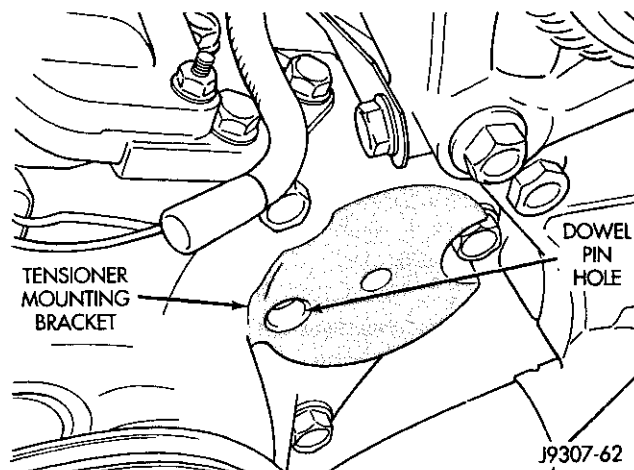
Tensioner Dowel Hole—5.9L HDC-Gas and 8.0L V-10 Engines
